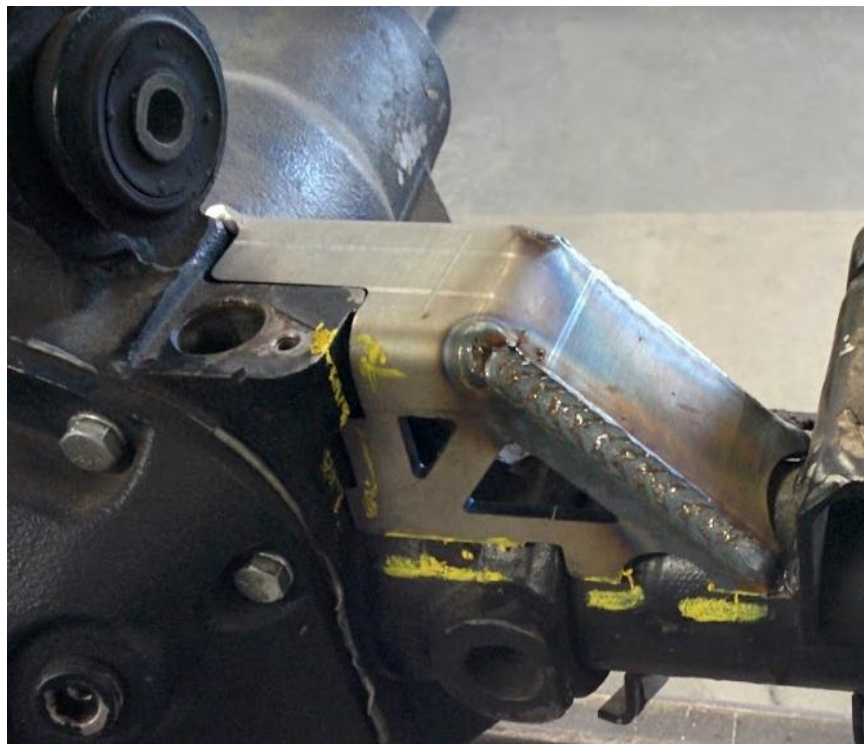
Passenger Side Front Axle Upper Control Arm Bracket
